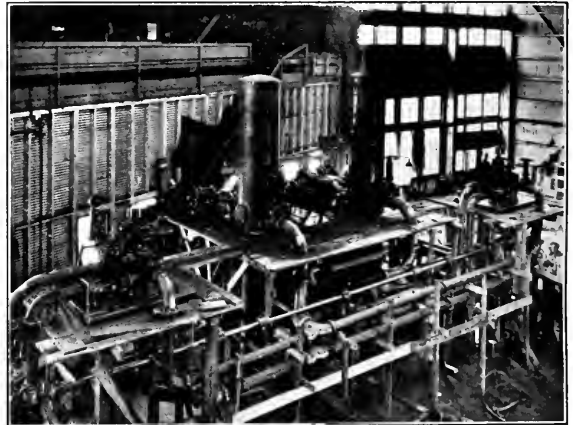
COMPLETE SHOP ASSEMBLY OF GOVERNOR AND OIL PRESSURE SYSTEM
